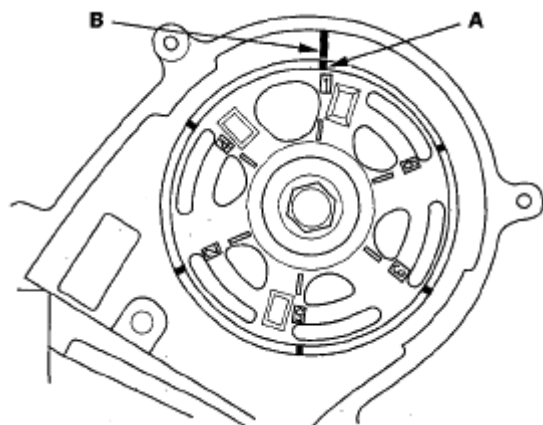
Identifying TDC Marks On Camshaft Pulleys - Front
